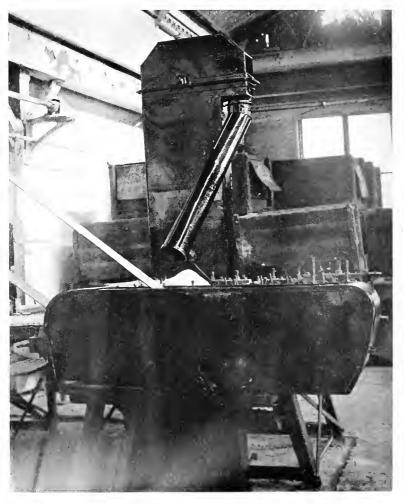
Fig. C.—Surface planer illustrating belt guards, exhaust system for carrying over shafting, also a sheet metal guard over lower drive shaft. Gear guards are illustrated in this print. (Courtesy of the American Steel and Wire Company.)
